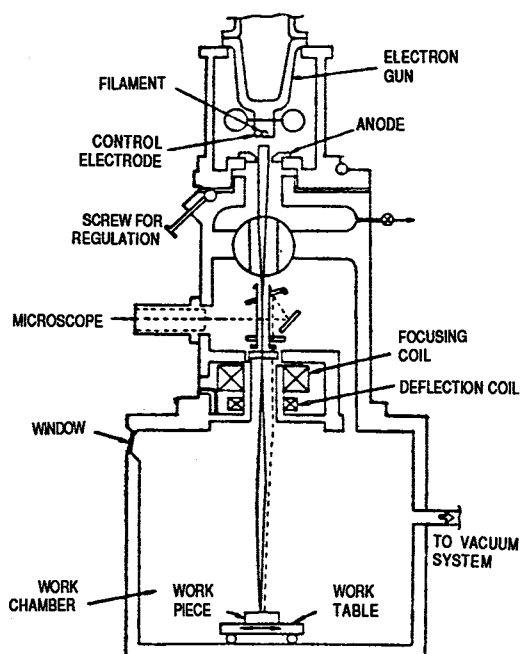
Schematic representation of EB welding machine [23]
